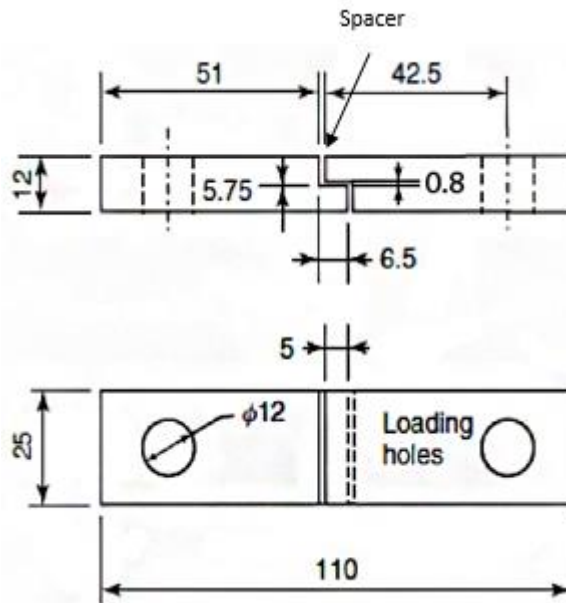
TAST specimen geometry with dimensions in mm [40].
